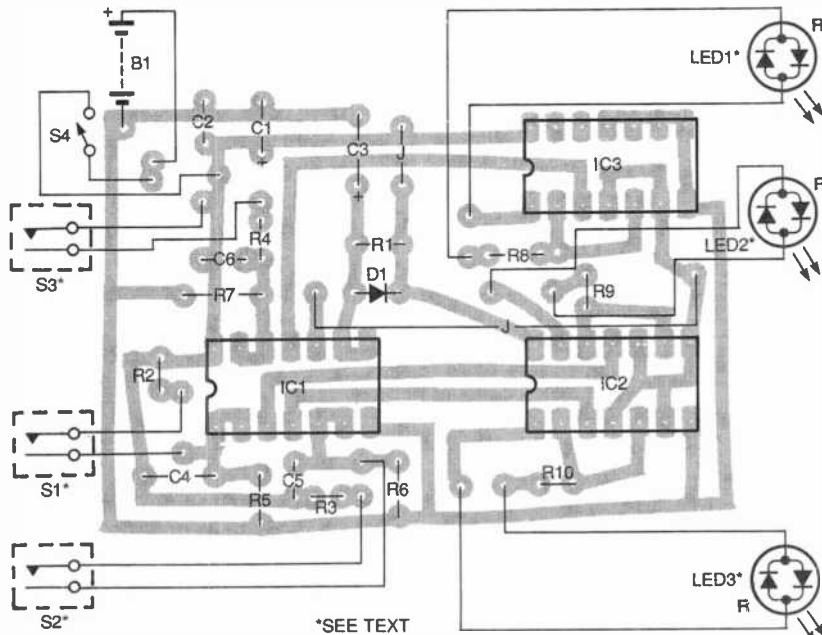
This parts-placement diagram should make assembling the board simple. Note the "R's" that indicate which sides of LED1-LED3 are red.
